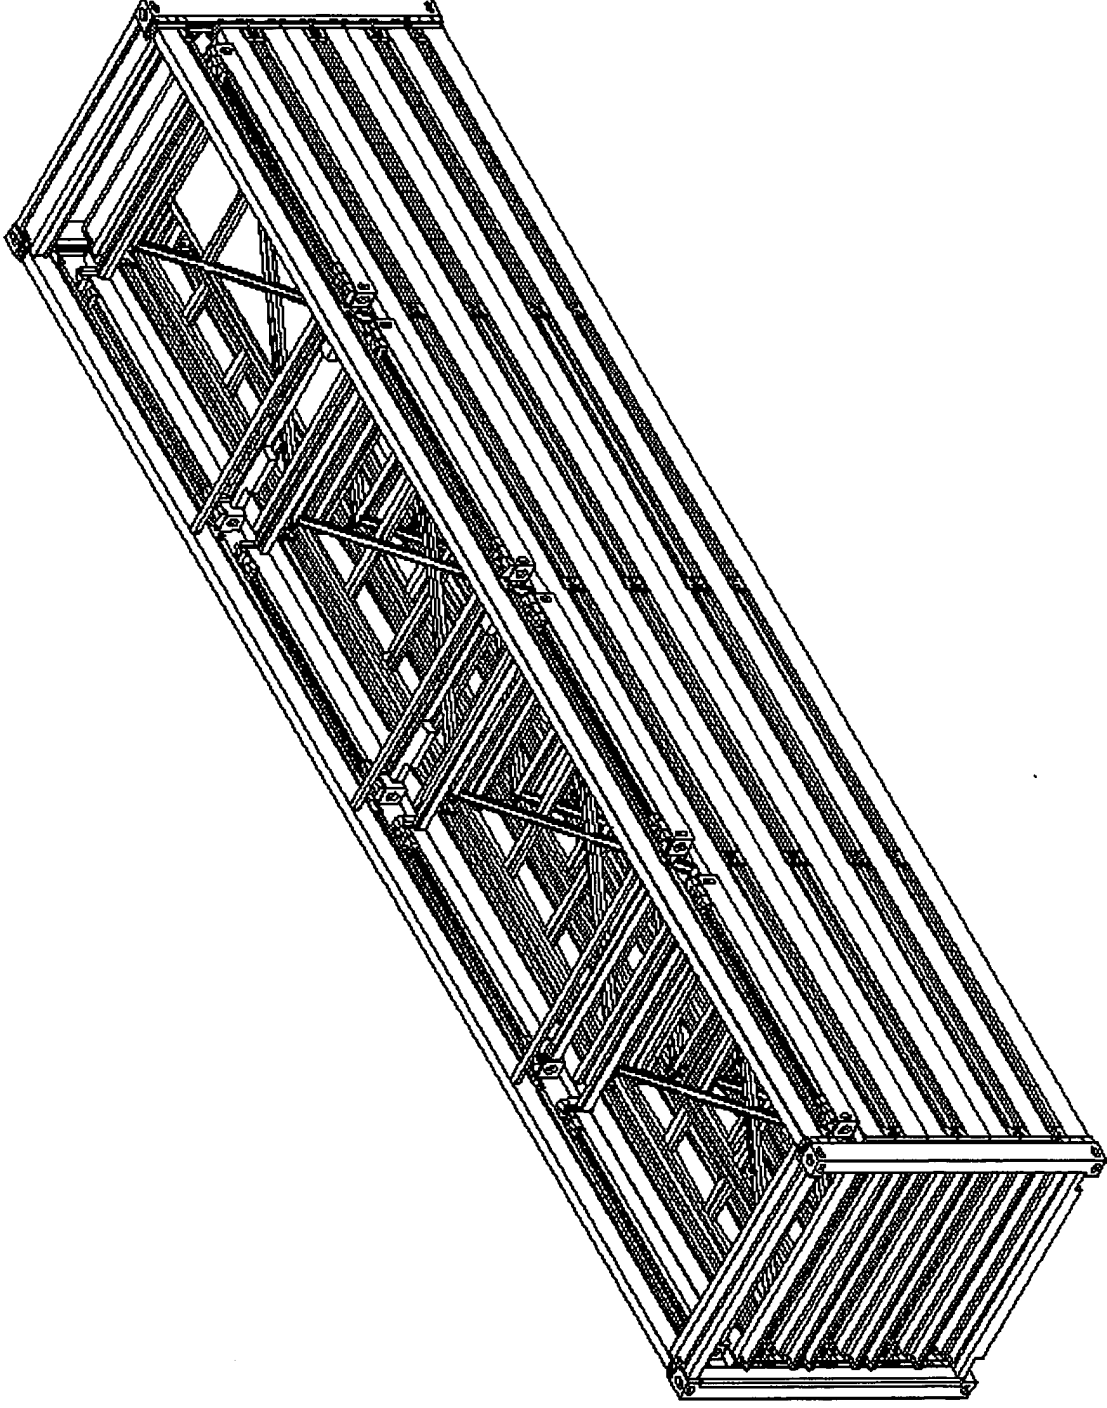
A: Step8 of disassemble and load process: The ceiling frame of the shipping collapsible cargo container is assembled.
